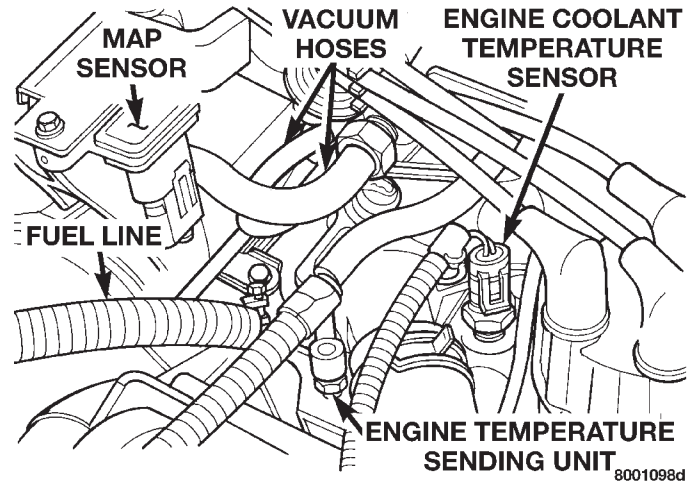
Engine Coolant Temperature Sensor—3.0L
